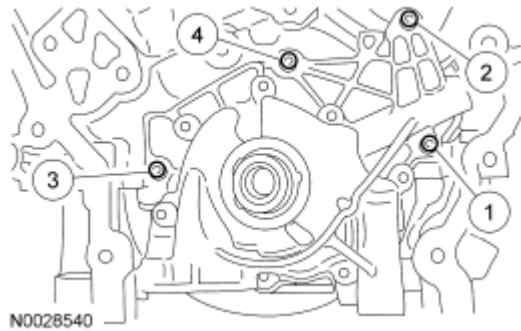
Identifying Removing Sequence Of Oil Pump Bolts
